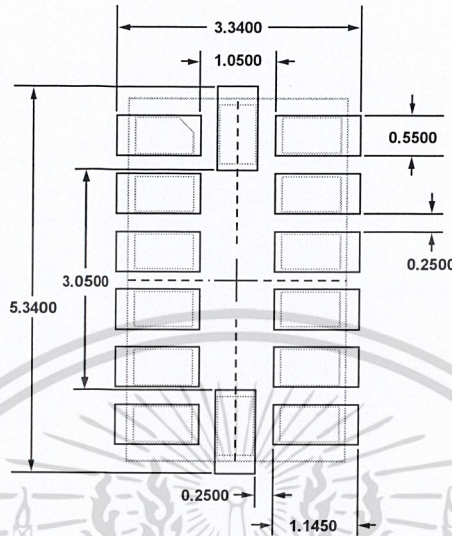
Recommended Printed Wiring Board Land Pattern (Dimensions shown in millimeters)
